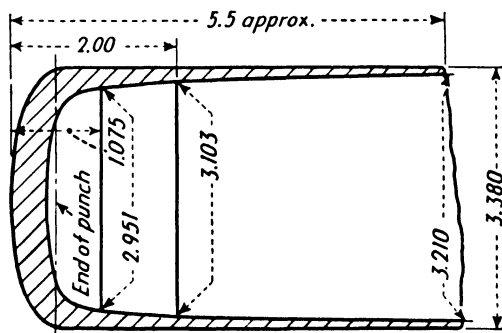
Dimensions after the first redraw show a 35 per cent reduction at the bottom of the shell and 60 per cent at the top.
